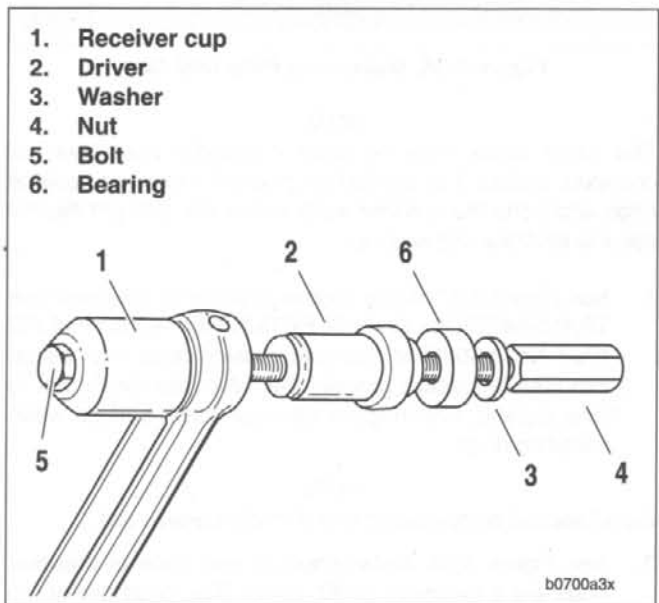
Piston Pin Bushing Tool Assembly for Bushing Removal
